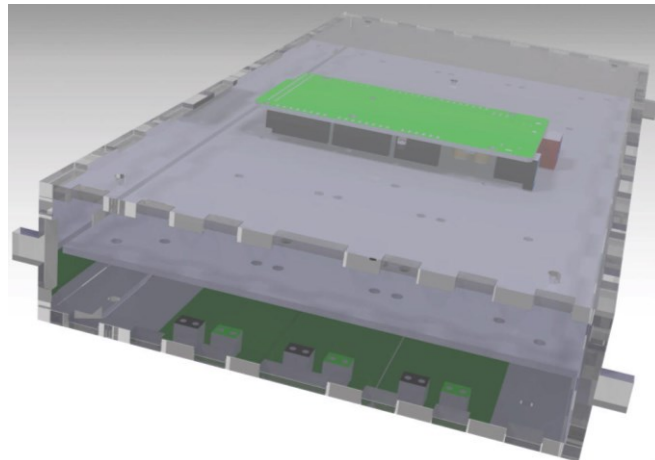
3D CAD FRAME OF ELECTRONIC BOX DOWN-SIDE
